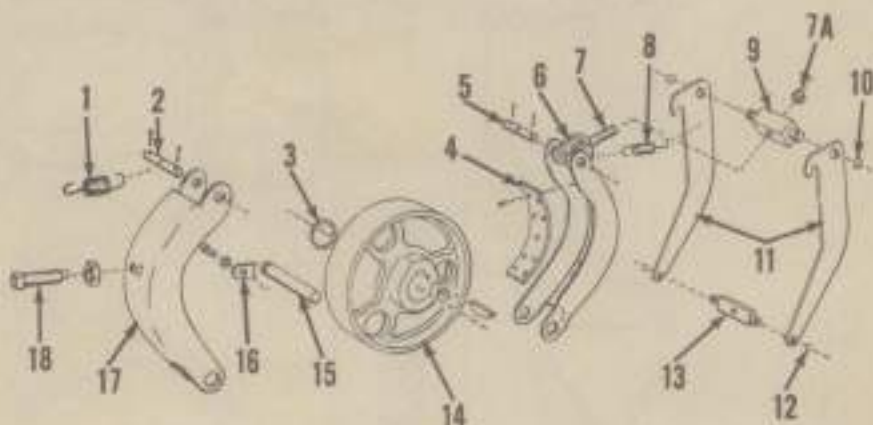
Exploded view of the brake assembly used on D-17 tractors prior to tractor Serial No. D17-42001. Brake drums (14) are keyed and press fitted to the inner end of each final drive bull pinion shaft.
